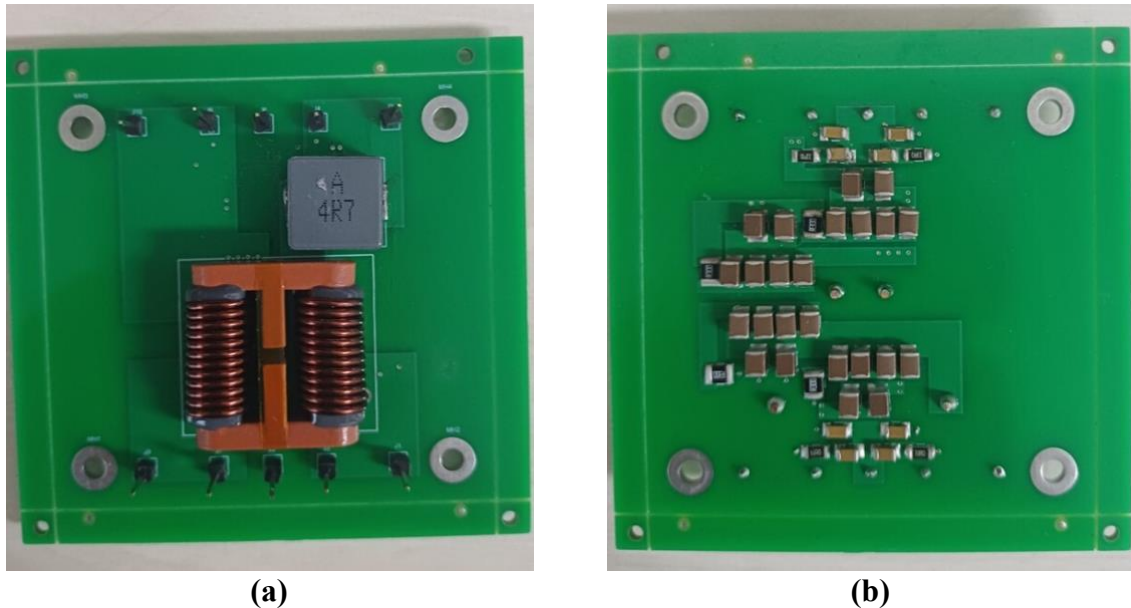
EMI filter prototype: (a) top view and (b) bottom view.
